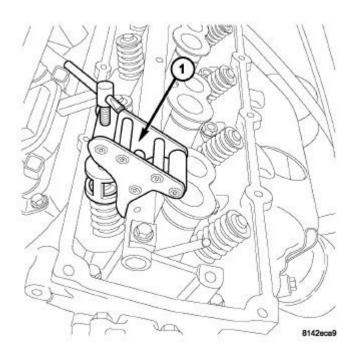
VALVE SPRING REMOVAL/INSTALLATION INTAKE Courtesy of CHRYSLER LLC
